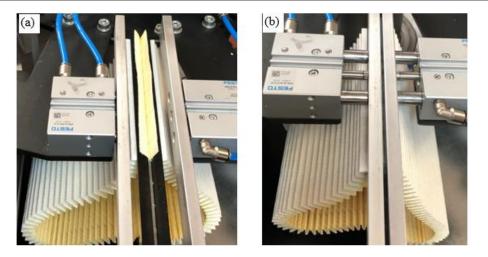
Application of machine assembly with hot glue. a) before compression, b) after compression.
